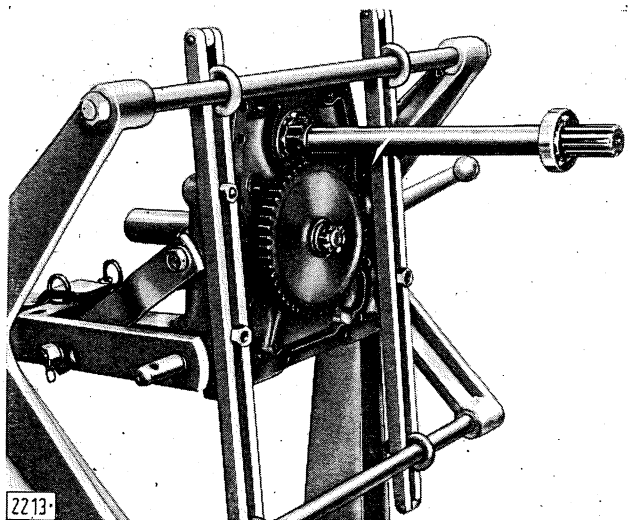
P.T.O. unit installed on turnover stand ARR 2220.
